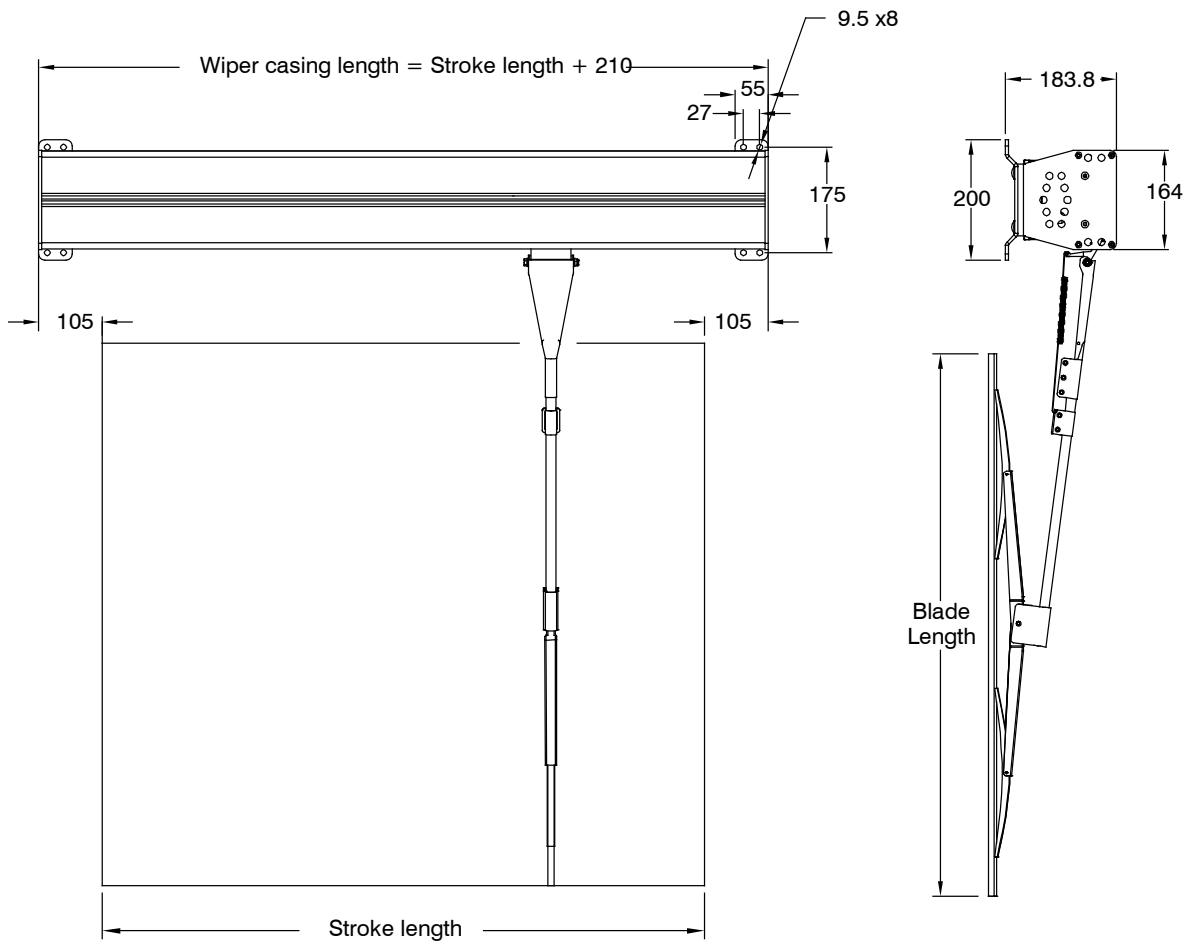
Wiper Unit Dimensions (all measurements in mm)
